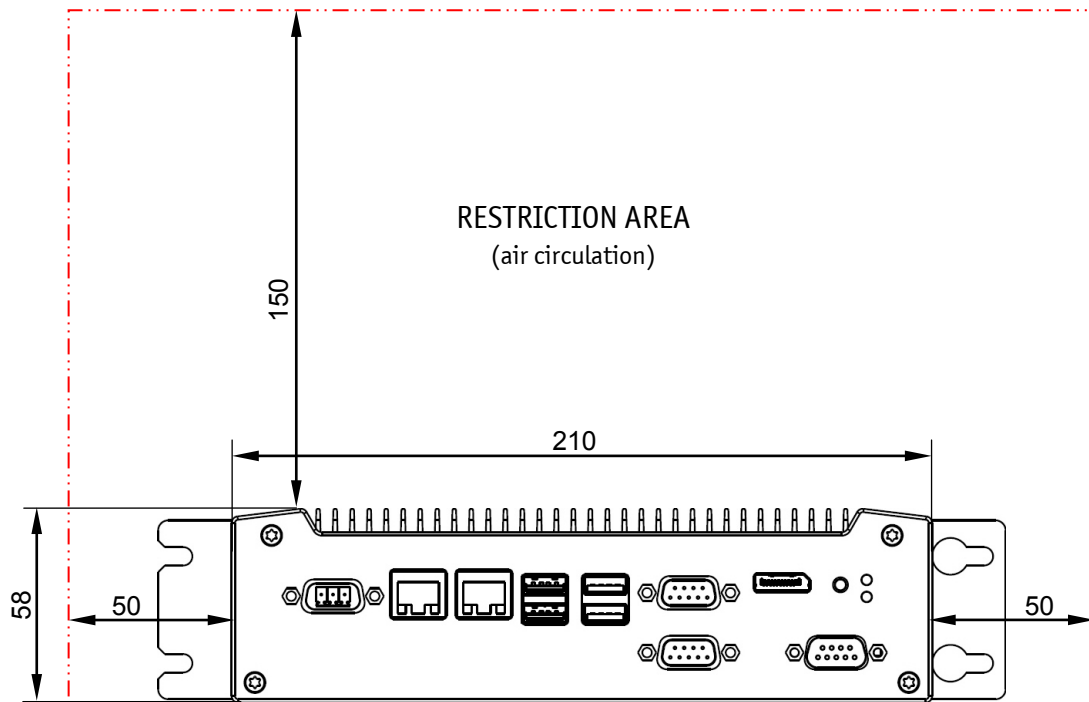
Dimensions in front view for KBox A-101 with bracket for cabinet mounting
